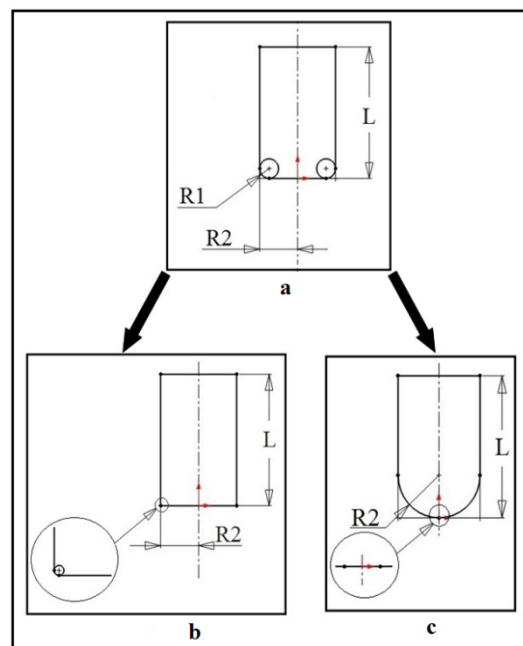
Tool Shapes: (a) Torus end mill, (b) Flat end mill and (c) Ball end mill.
